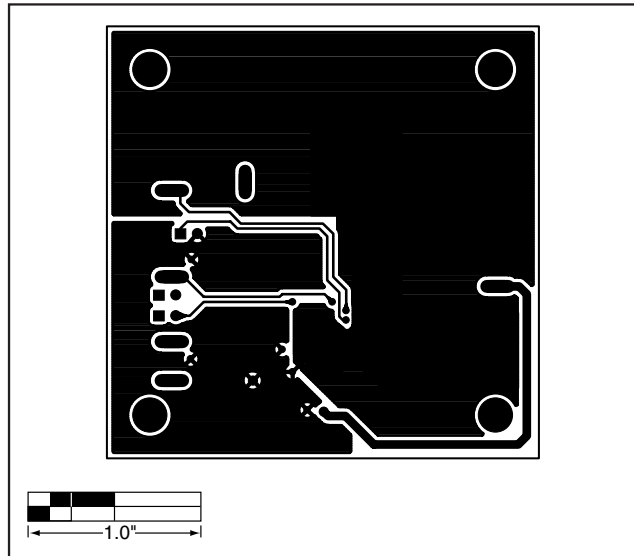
MAX1709 EV Kit PC Board Layout—Solder Side
